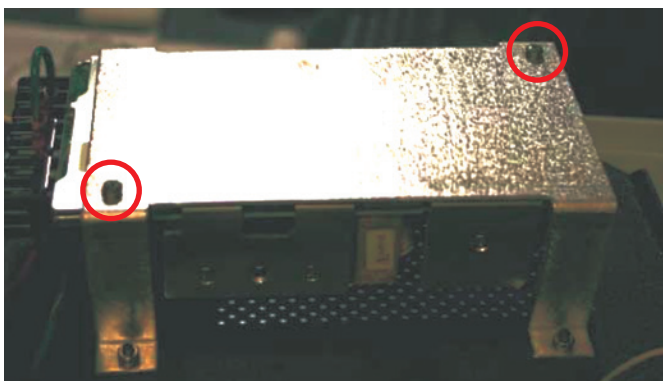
THE AC POWER SUPPLY MODULE MOUNTING BRACKET SECURING SCREWS.
